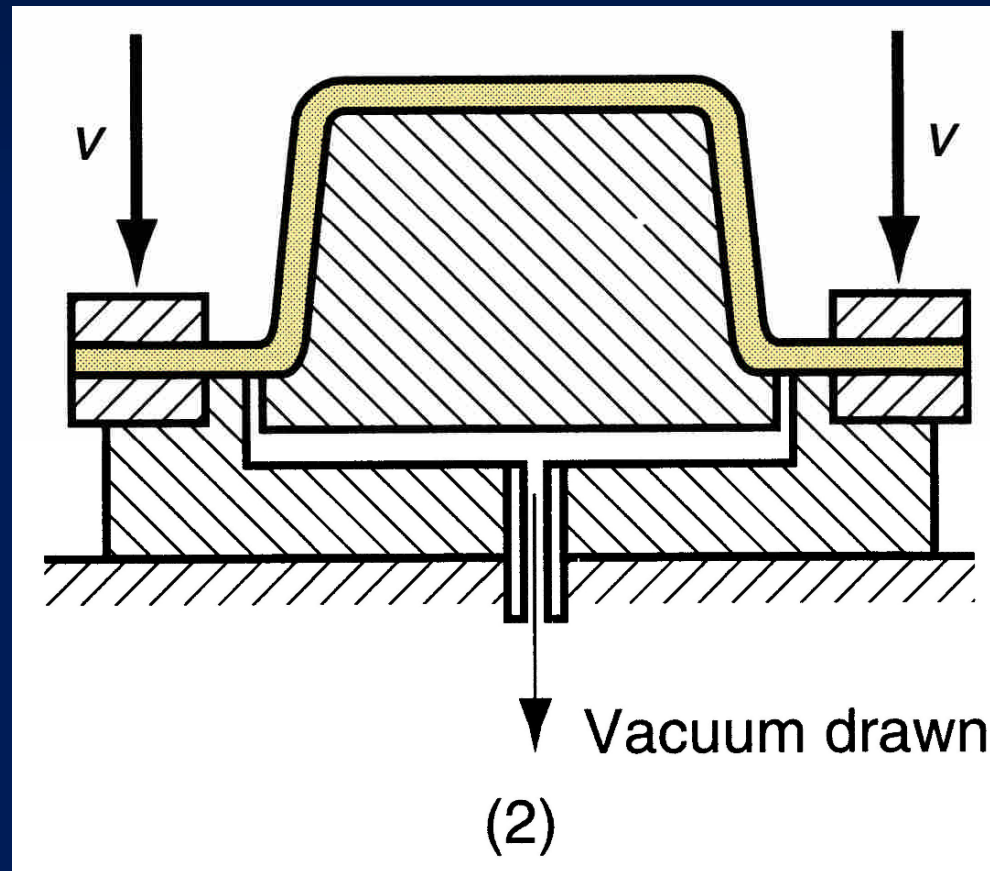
Use of a positive mold in vacuum thermoforming:
